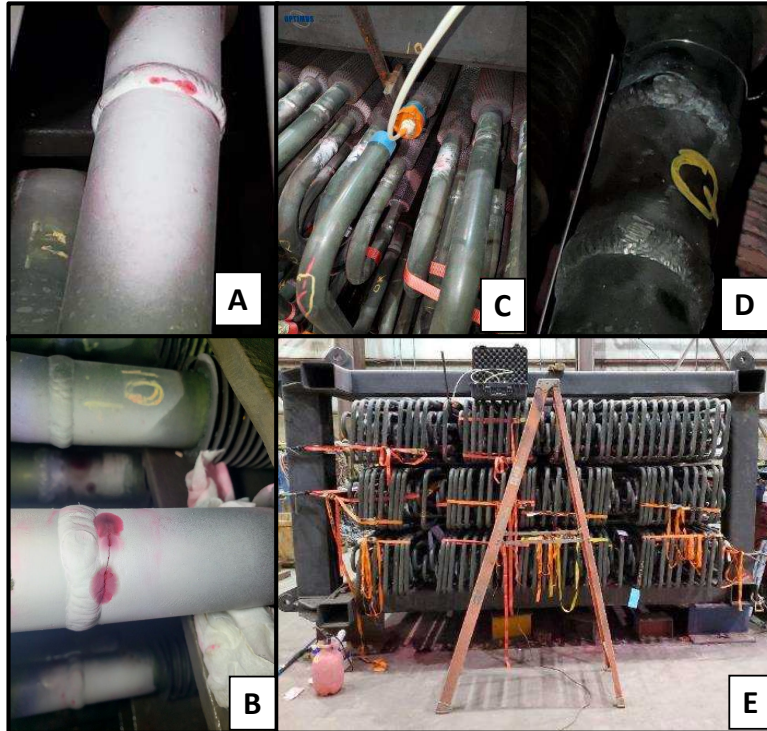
Cracking observed after PWHT (a and b) in 740H tube butt welds and repair procedure including removal (c), pup-piece replacement (d), and moving tubes for welder access (e)
